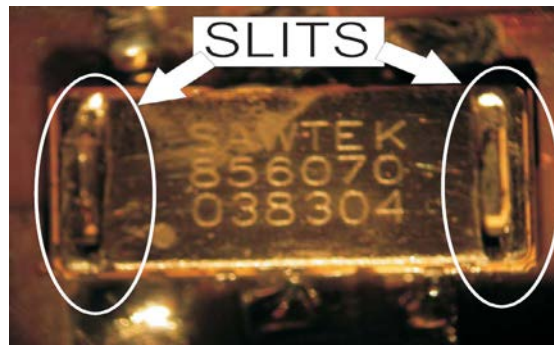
LiNbO₃ packaged device soldered to PCB with 1mm x 6mm slits in both ends of the package.
